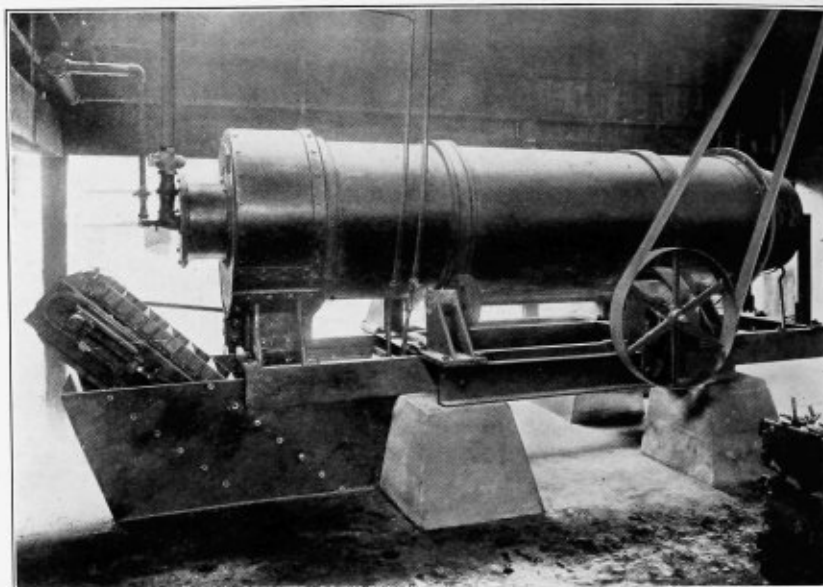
Rotary Annealing Furnace—Gas Fuel.  Annealing Bolts, Rivets, Screws, Etc.
